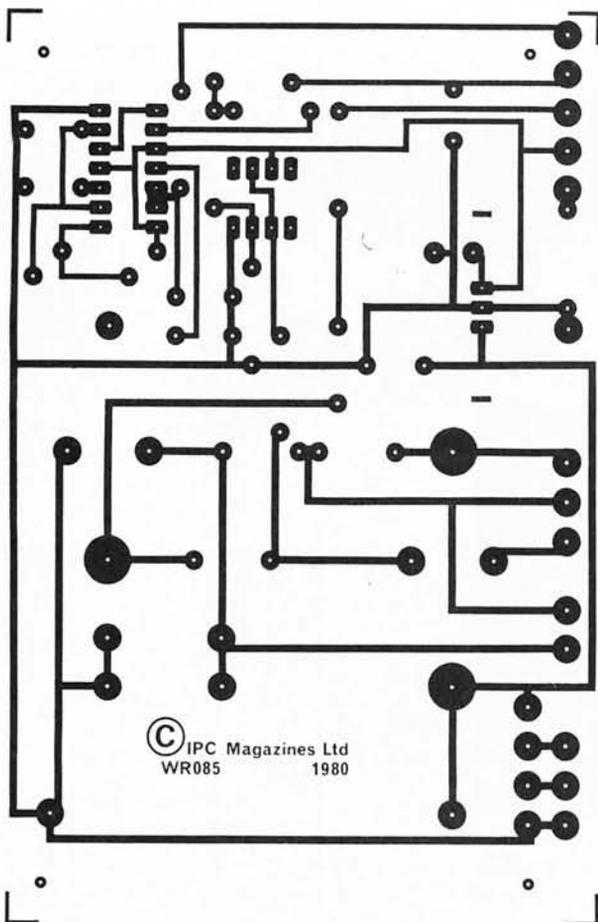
The copper track pattern for the p.c.b. shown full size. The component placement drawing Fig. 5 is shown above right. Components not mounted on this board should be fitted onto the control panel using the tags on the potentiometers as mounting points
